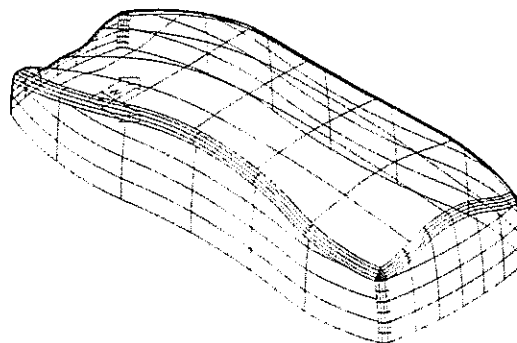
Splines hidden, corner fillet surfaces constructed
